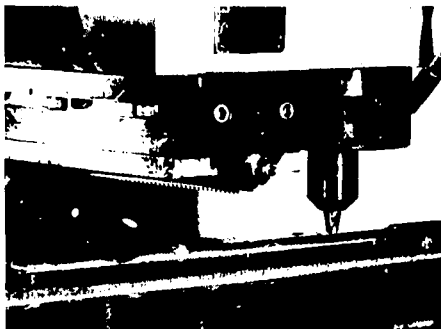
Grid-Wire-Holder Machining Showing Integral Mounting of Milling Cutter and Slot Broach
